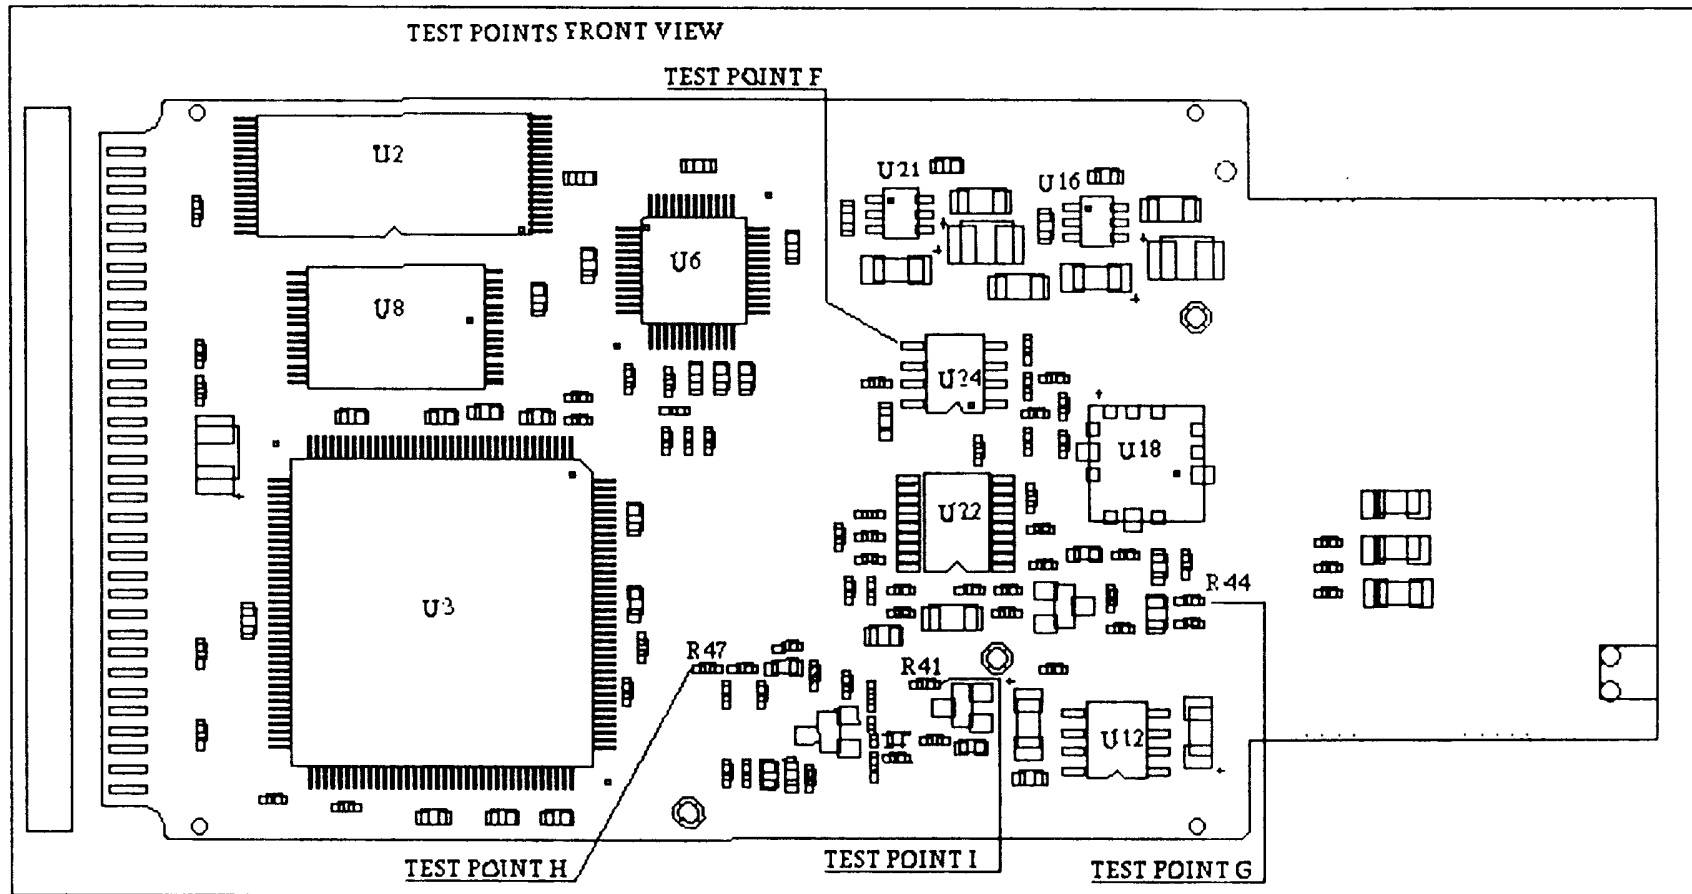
WIRELESS LAN PC CARD TEST POINTS (FRONT VIEW)
